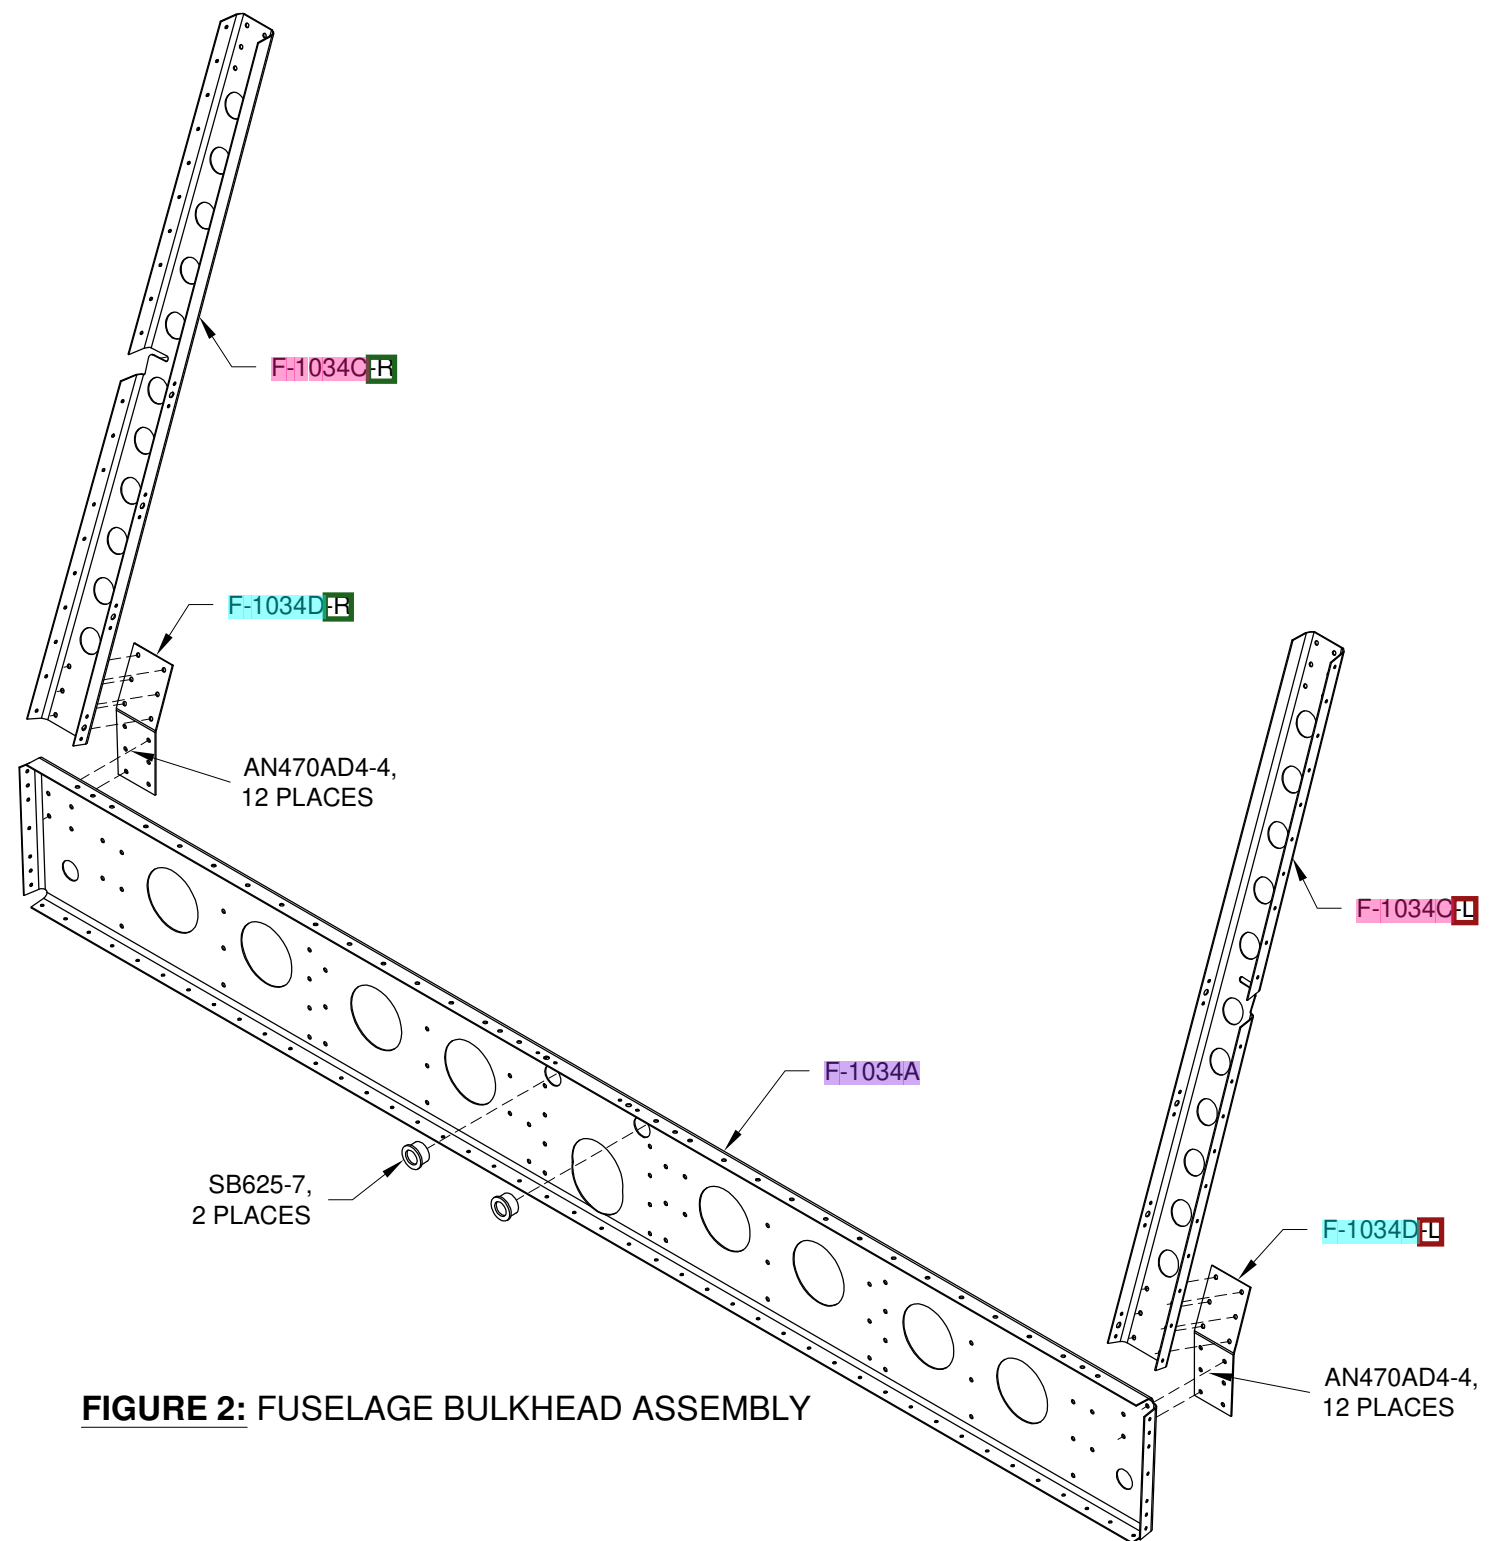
FUSELAGE BULKHEAD ASSEMBLY
